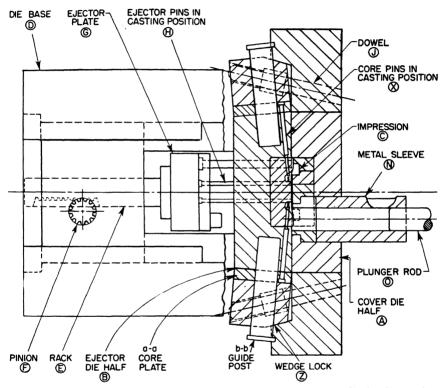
Section of the cover- and ejector-die halves with the die in the casting position.
